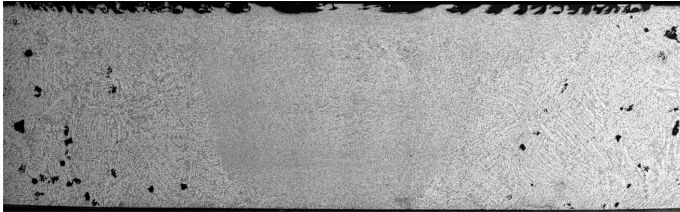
FSW weld structure. Welding parameters: no. 3 of Table 3
